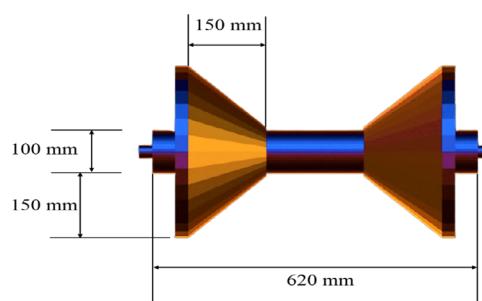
Fabricated design of bed shaper roller for bed cum trenching.
